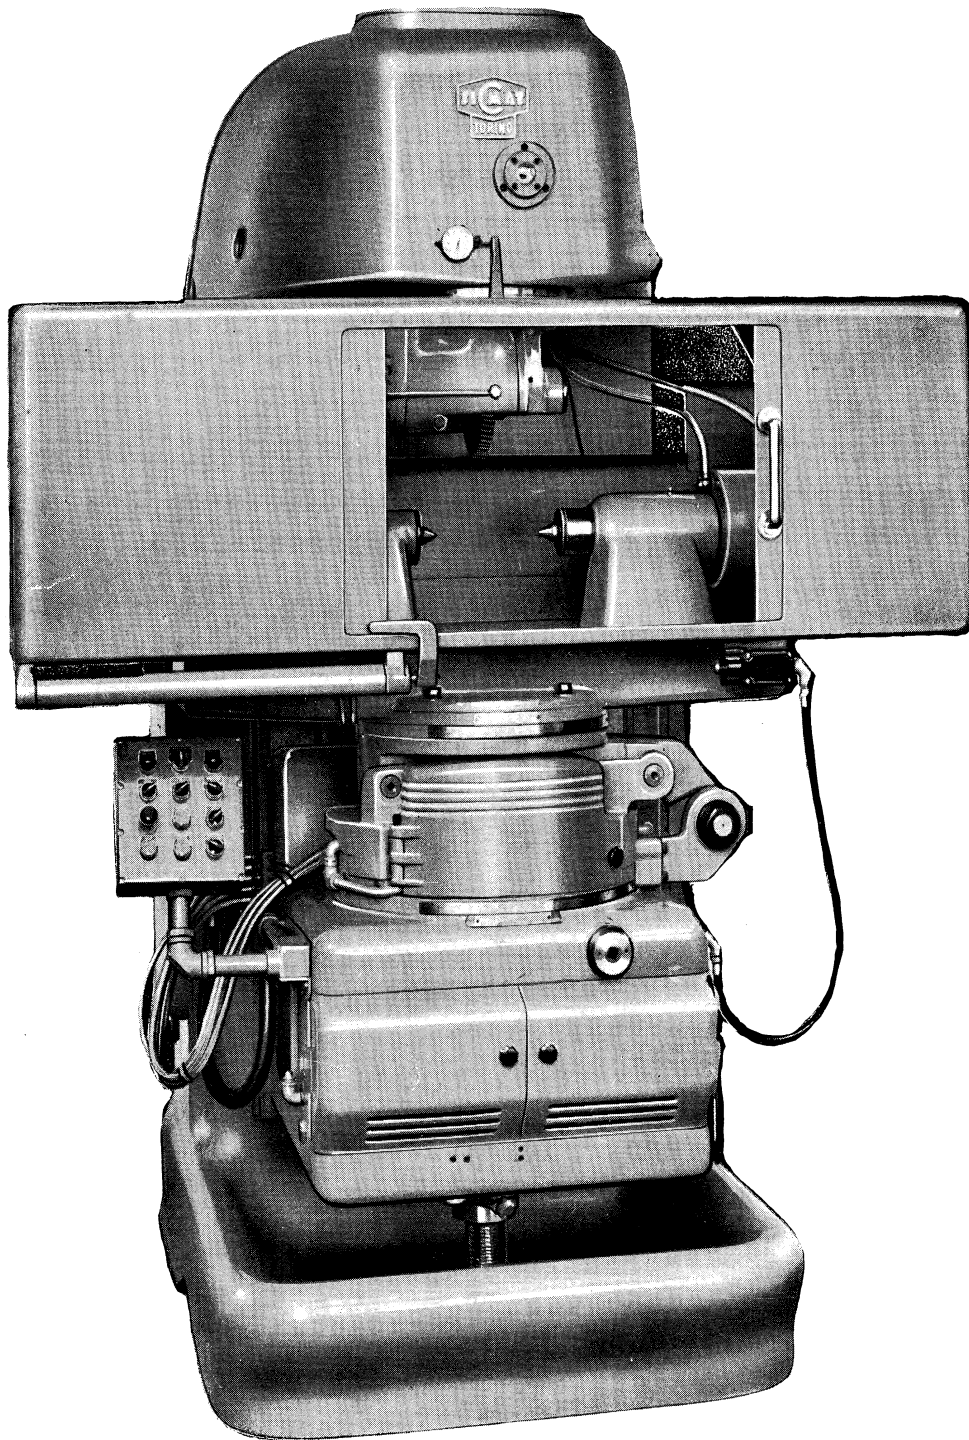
Universal Gear Shaving Machine. Made by Sicmat, Turino, Italy.
